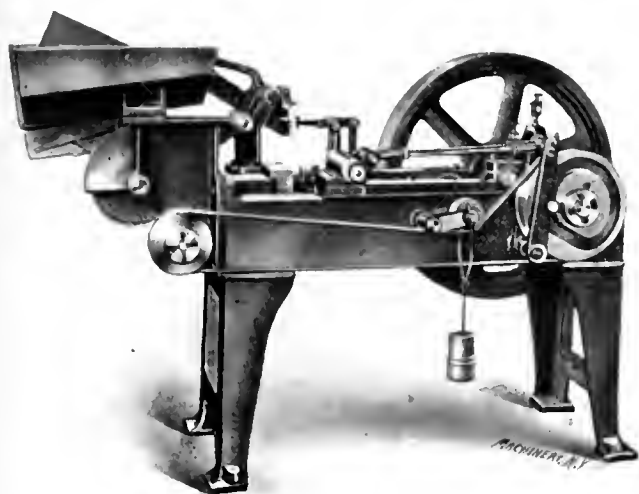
Manville Machine Co's Automatic Bolt Head Trimmer.
